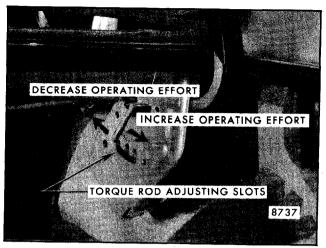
Right Side Torque Rod with Trim Removed - Cadillac K Style
